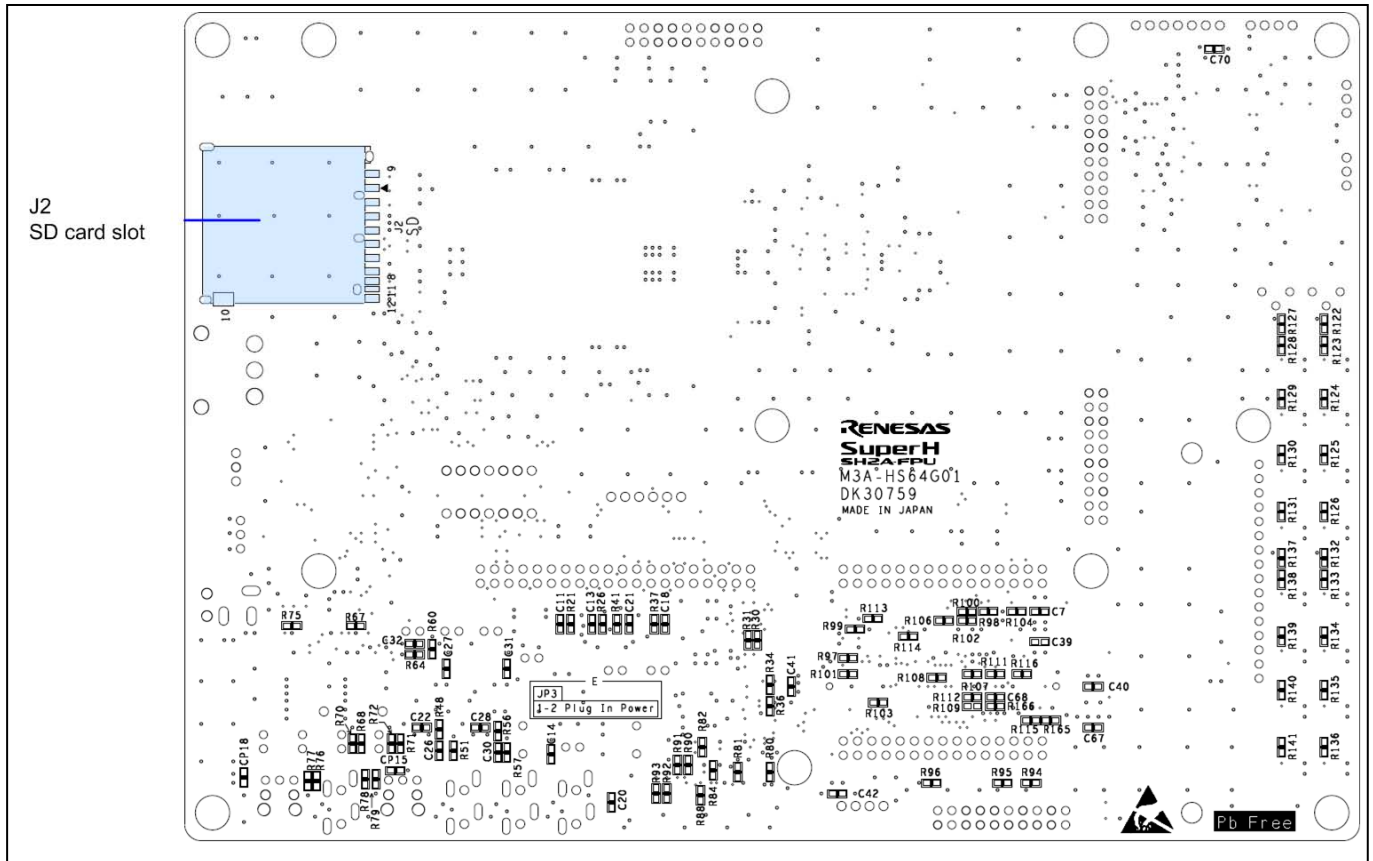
M3A-HS64G01 Layout and Component Placement (Top View of the Solder Side)
